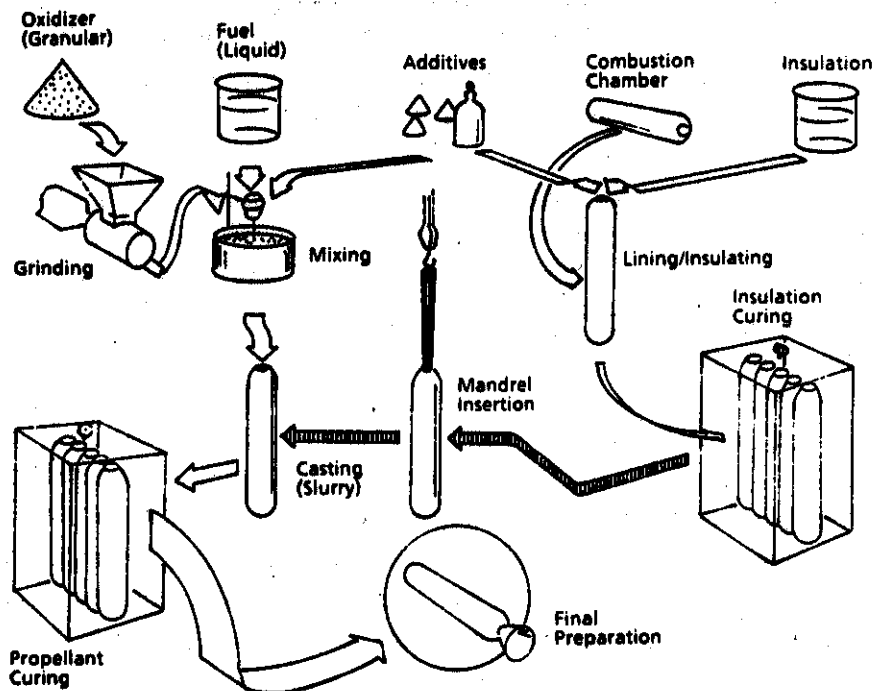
Manufacture of engine with internal-burning charge of castable composite propellant.
